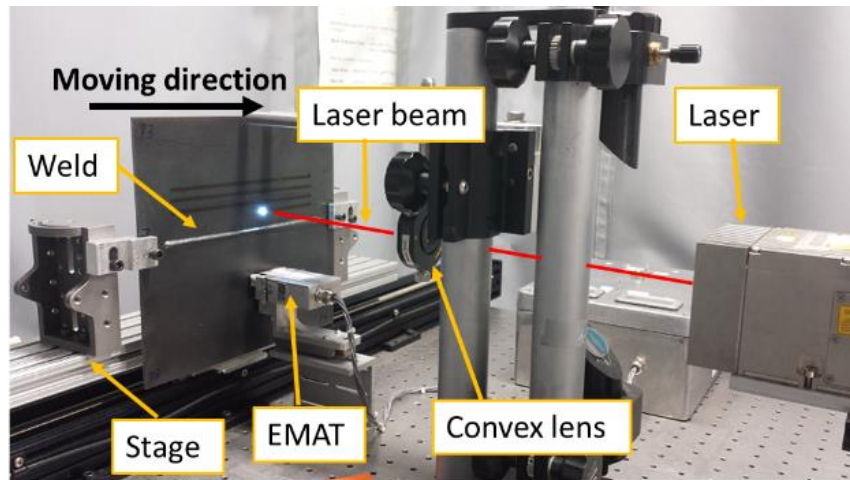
LEU setup for inspecting welded samples
